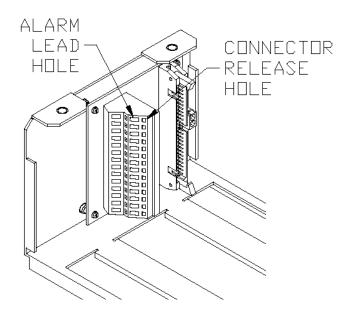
CB Alarm Interface Board (28 circuit breaker module)
